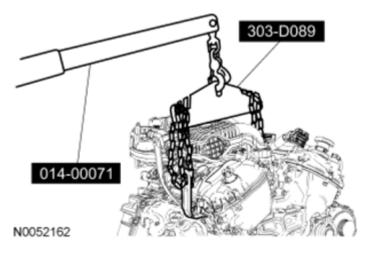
Identifying Heavy Duty Floor Crane And Spreader Bar Courtesy of FORD MOTOR CO.
